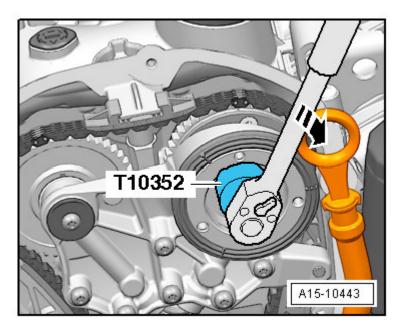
Identifying Assembly Tool T10352 To Remove Control Valve
